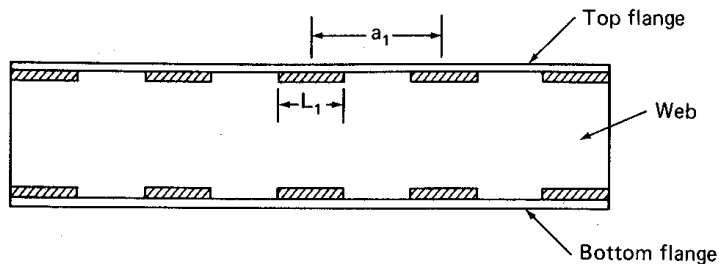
Intermittent flange-to-web fillet weld
